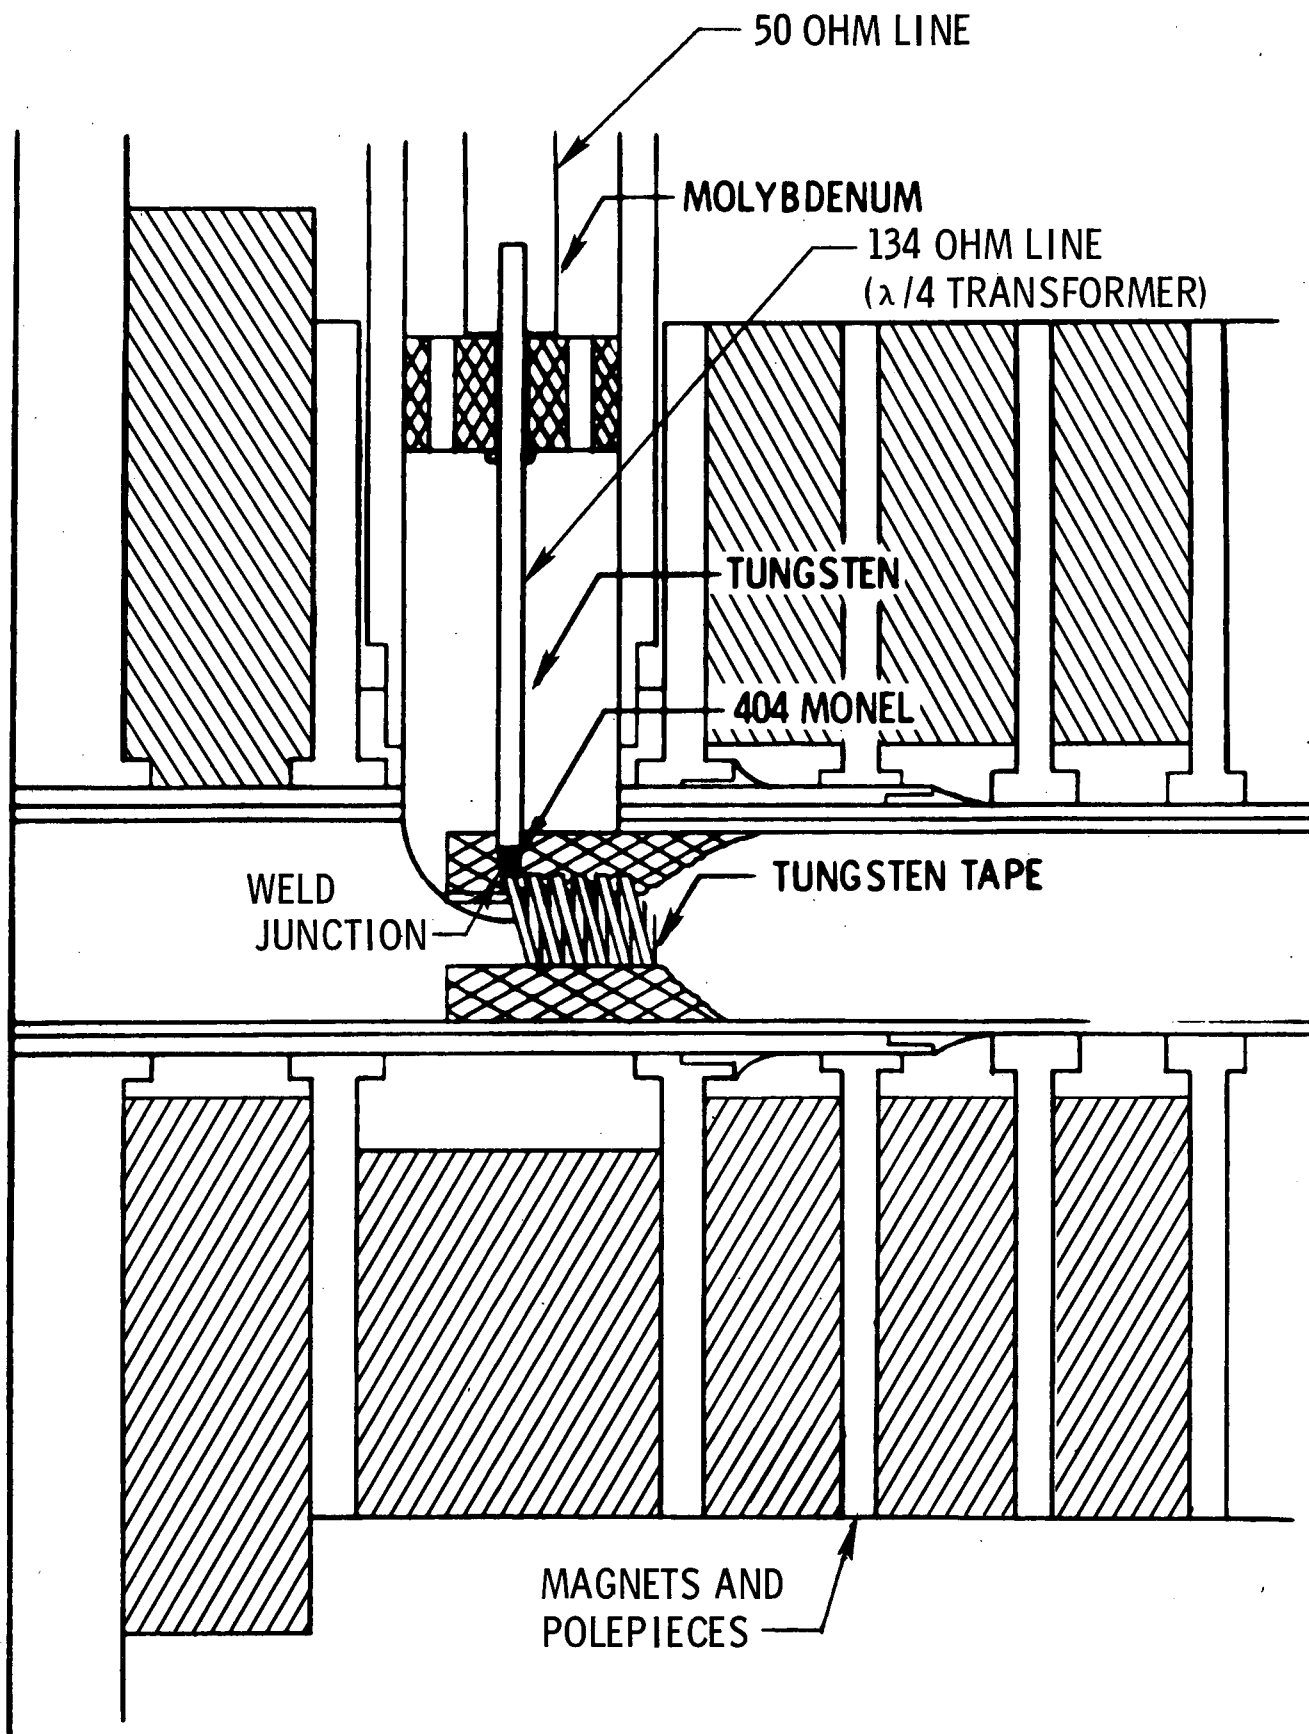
Cross-section of the coax to helix transition showing the $\lambda/4$ matching transformer and the weld junction.
